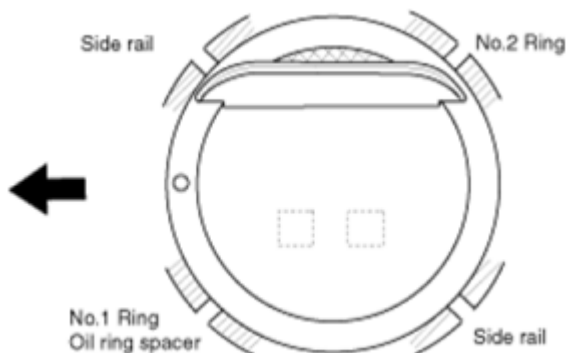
Identifying Piston Rings And Oil Ring Spacer
